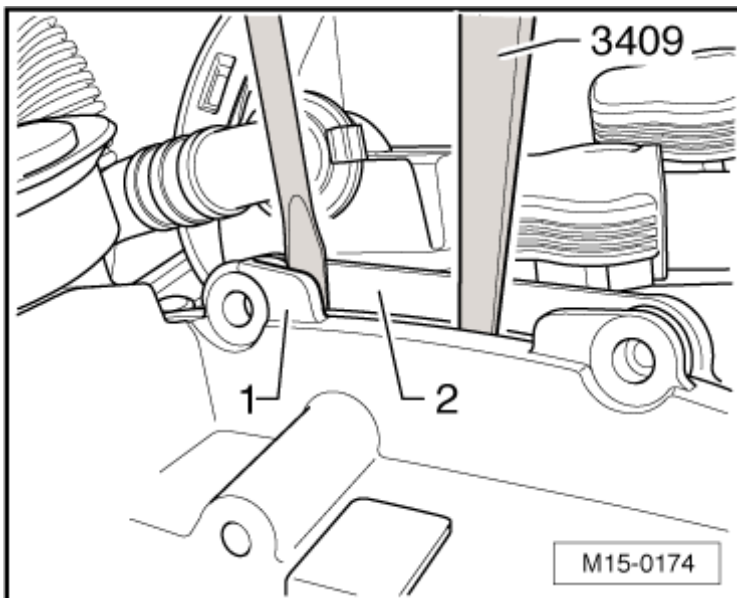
Identifying Chain Case Cover Pressed Off Uniformly From Cylinder Head At Top And Bottom Recesses
